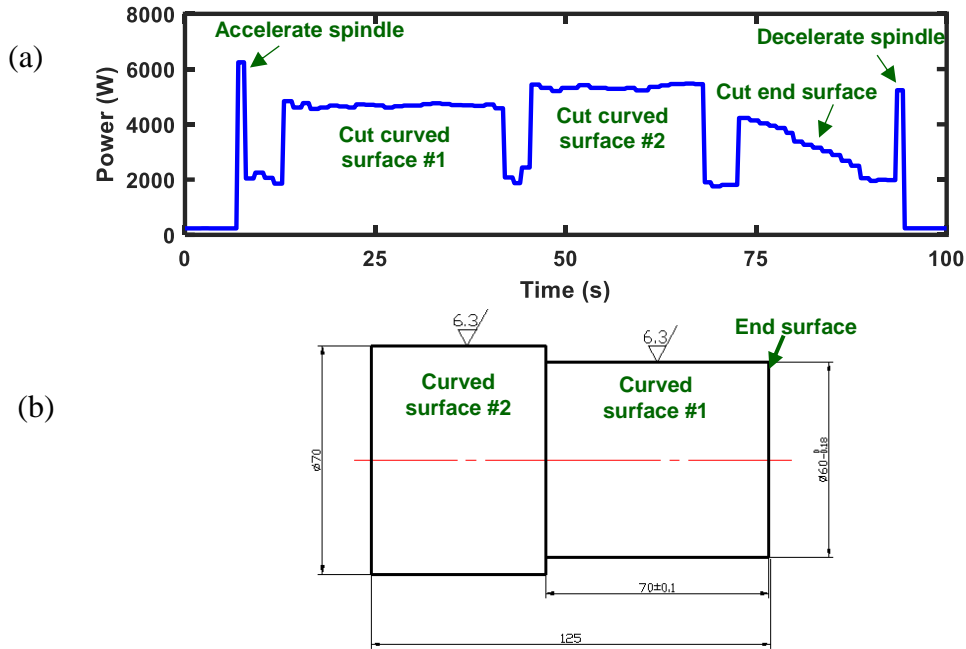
(a) The power profile of a turning machine; (b) The machined part (JIS S45C).
